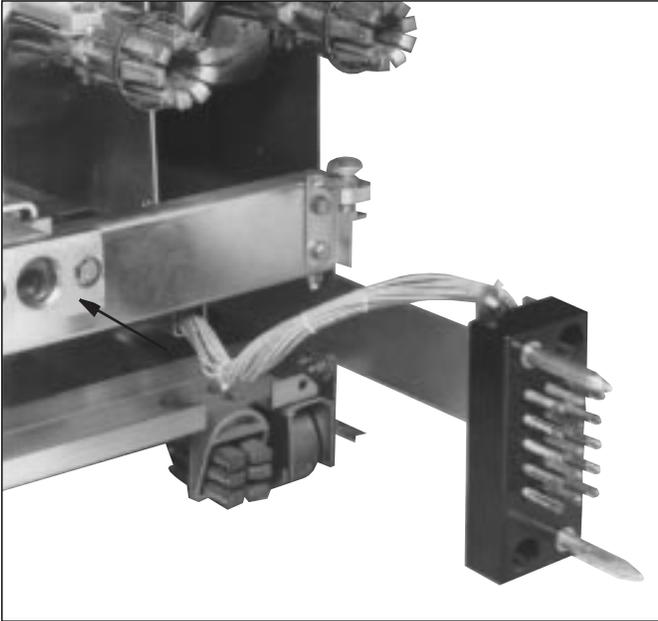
DHP-VR Breaker (5 kV) Levering-in Device Nut Housing
